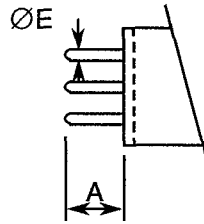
PHYSICAL DIMENSIONS(CONTINUED)
